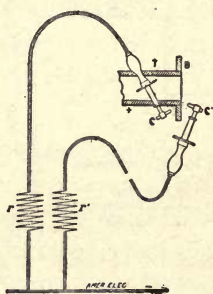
BERNARDOS' ARC WELDING PROCESS.
